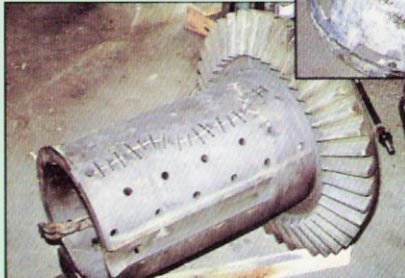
SHOWS A CRUSHER BEARING BEING REPAIRED.
